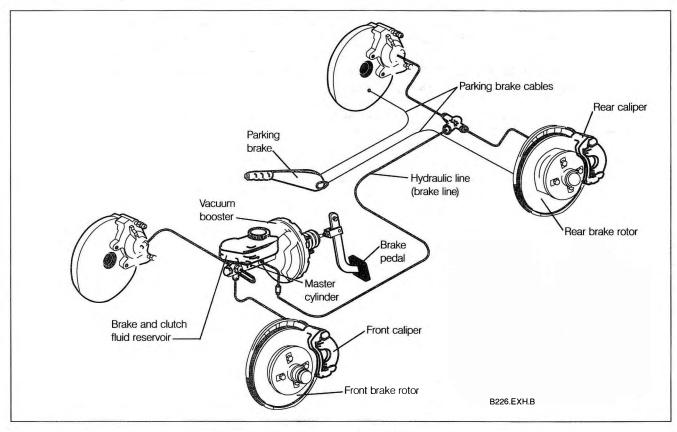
Schematic view of dual-circuit brakes. Four-wheel disc brakes shown. Front disc and rear drum system is similar.
